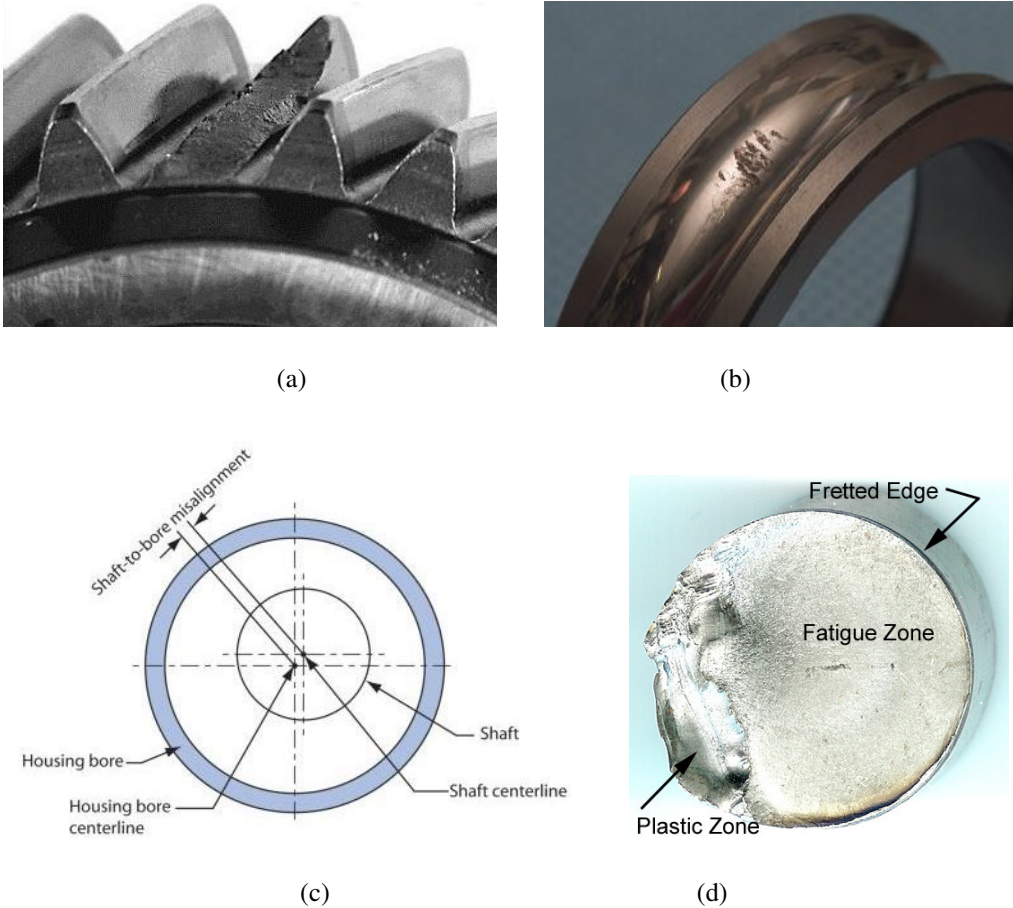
Mechanical faults (a) gear tooth crack, (b) bearing inner race defect, (c) static rotor eccentricity, and (d) shaft crack
